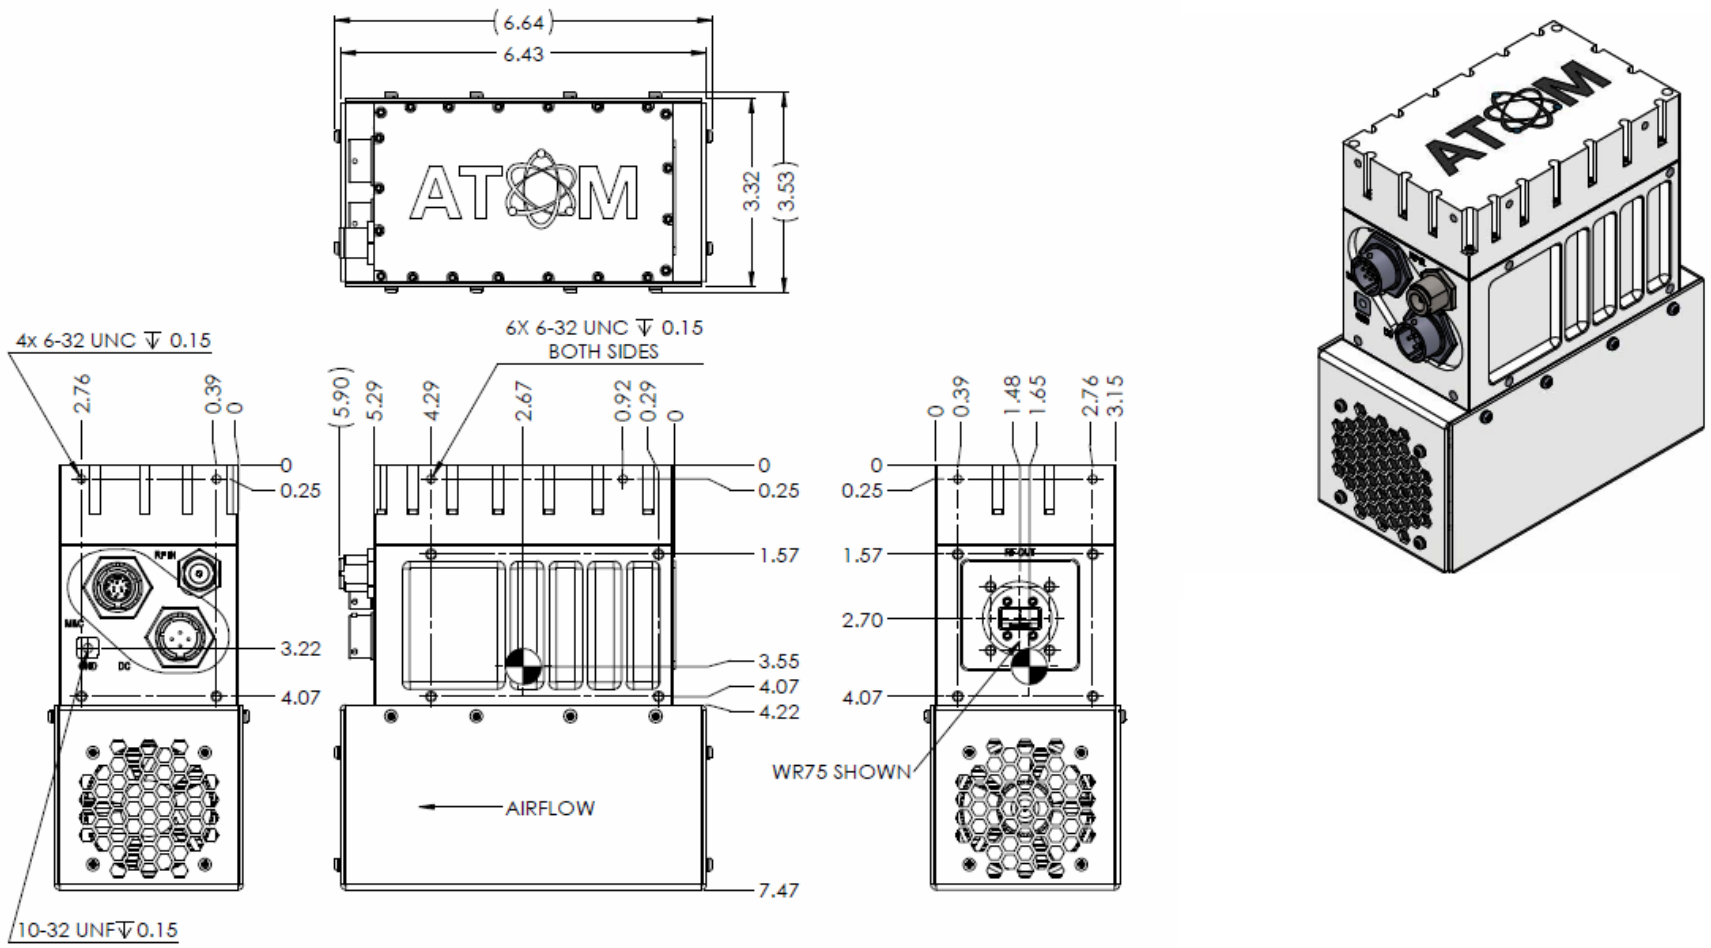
40W and 50W KU SSPA/BUC Assembly, with Fans and EMC/EMI Filter Option
